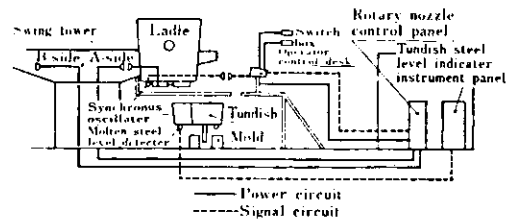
Automatic ladle pouring system of NKK type rotary nozzle.
